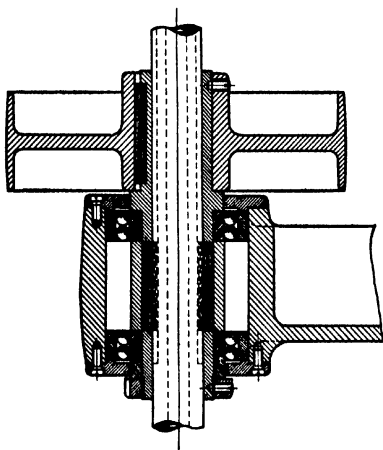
Belt pulley running on ball-bearings. Arranged to relieve spindle from pull of belt.
